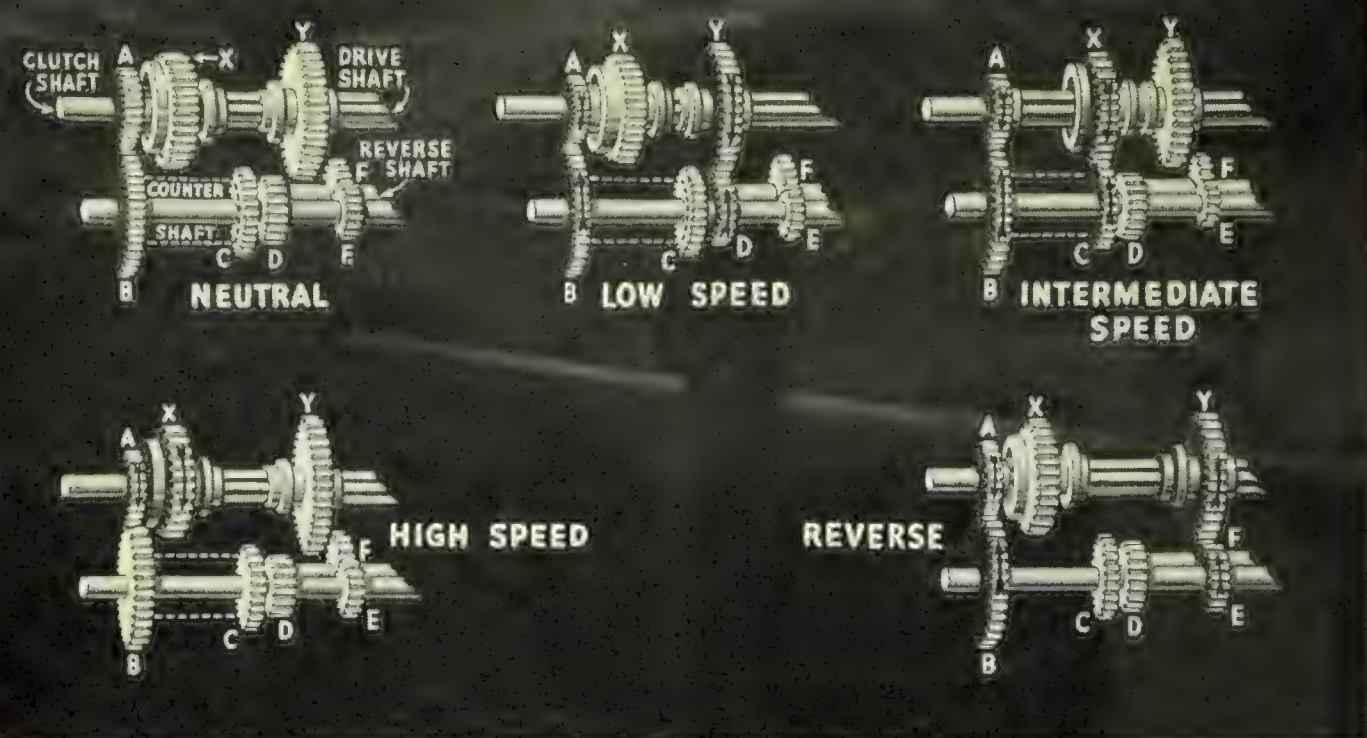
See if you can explain these drawings of the gear shifts. The letters have been put on the gears to help you explain what happens.
